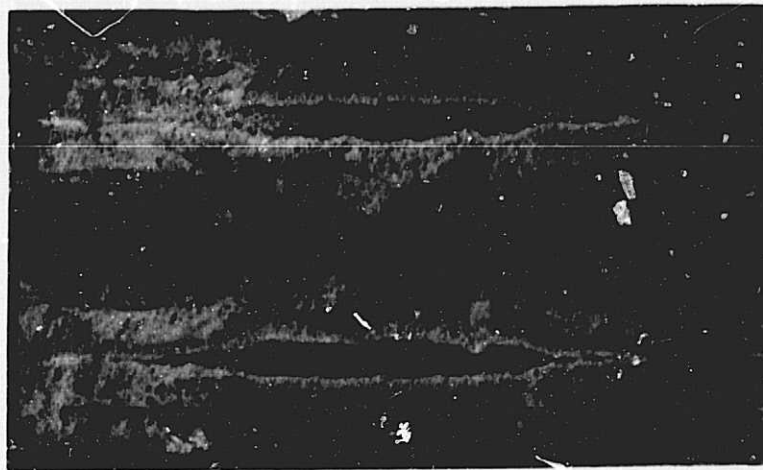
Radiograph and fracture surface macrograph of weld 2014-1.0-2B at IX.
